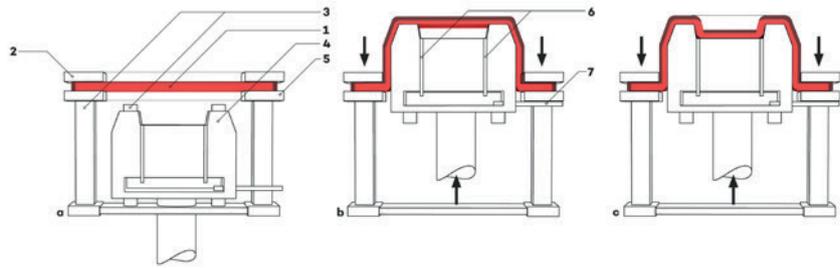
Vacuum-forming onto a male mold with mechanical pre-stretching. PLEXIGLAS® (1), clamping frame (2), supporting tubes (3), male mold (4), mold frame (5), suction ducts (6), vacuum connection (7).
